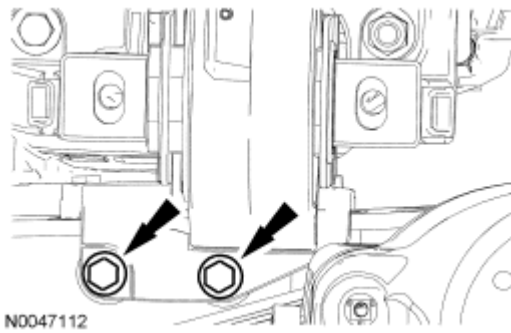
Locating Upper Bolts On Rear Transaxle Insulator
